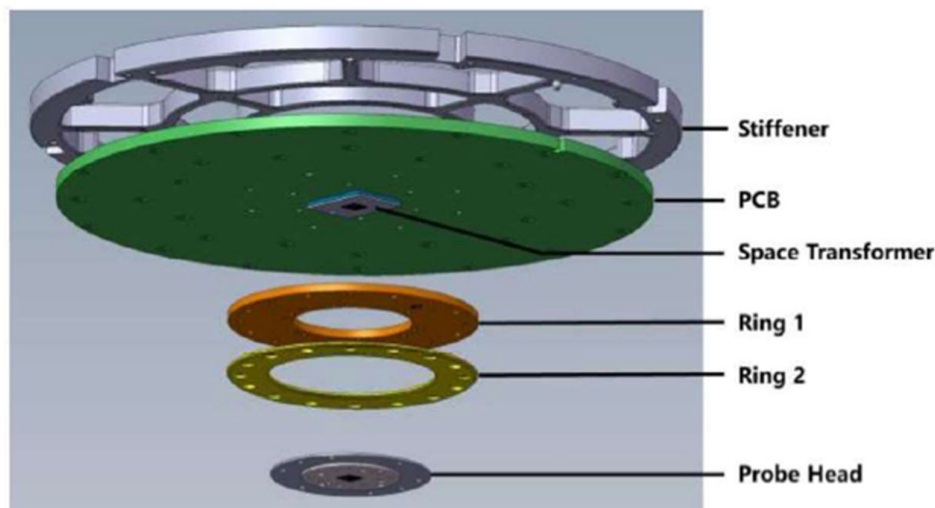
Exploded view of a Vertical MEMS probe card assembly highlighting the probe head, multilayer space transformer, PCB, mechanical rings, and stiffening structures.
